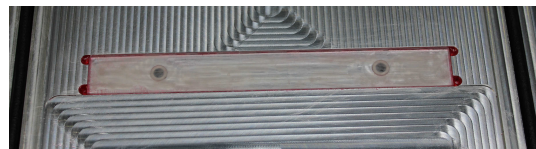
Step 5: Placing of endpiece on readout side (left) and mirror side (right) in casting mold and sealed with Latex
